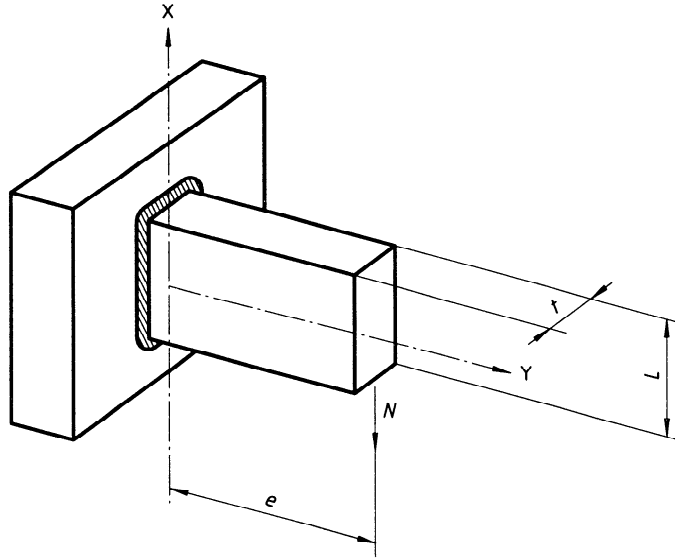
Welds eccentrically loaded in X-Y plane
